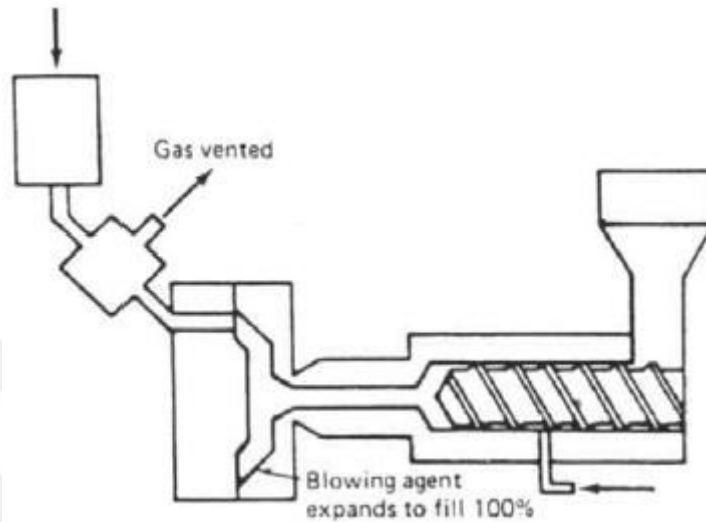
Gas counter pressure foam injection molding machine [85].
